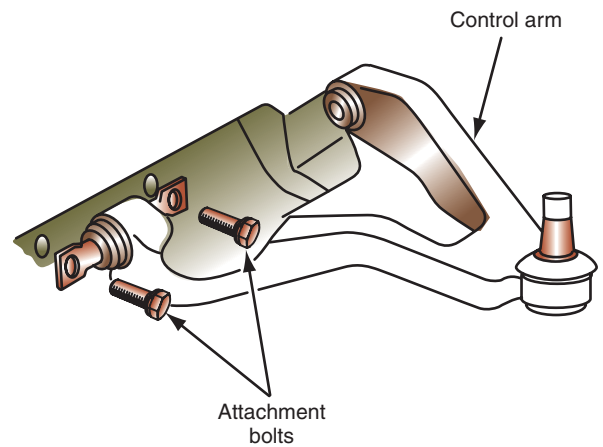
Removing the lower ball joint bolts and nuts from the lower control arm.
